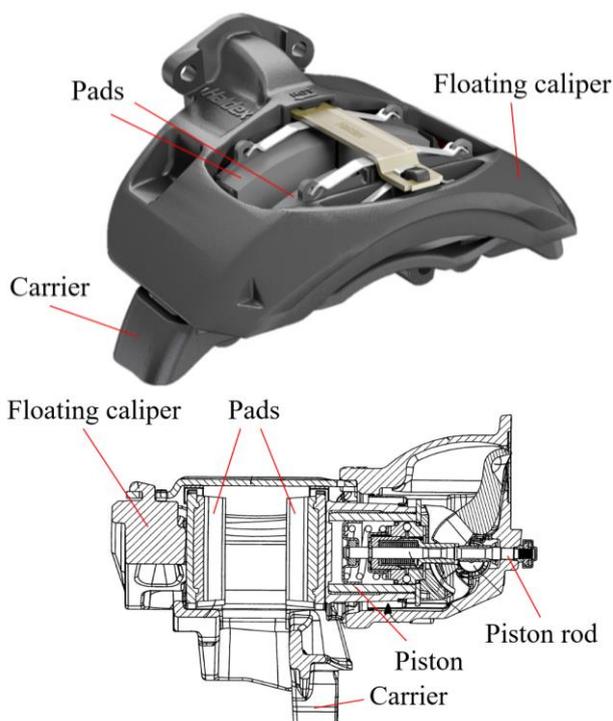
Upper: Disc brake with its floating caliper, knuckle and pads. Lower: Cross-section view of the disc brake with piston and piston road.
